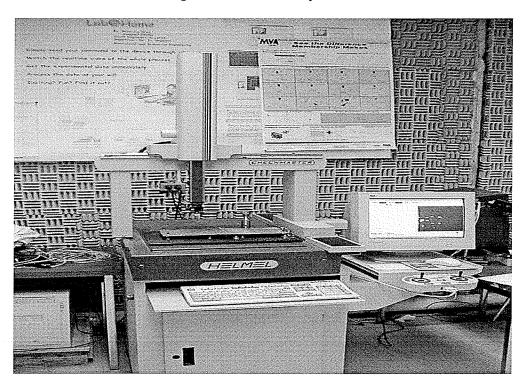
The Checkmaker Coordinate Measuring Machine (CMM) (Model 216-142 DCC)
